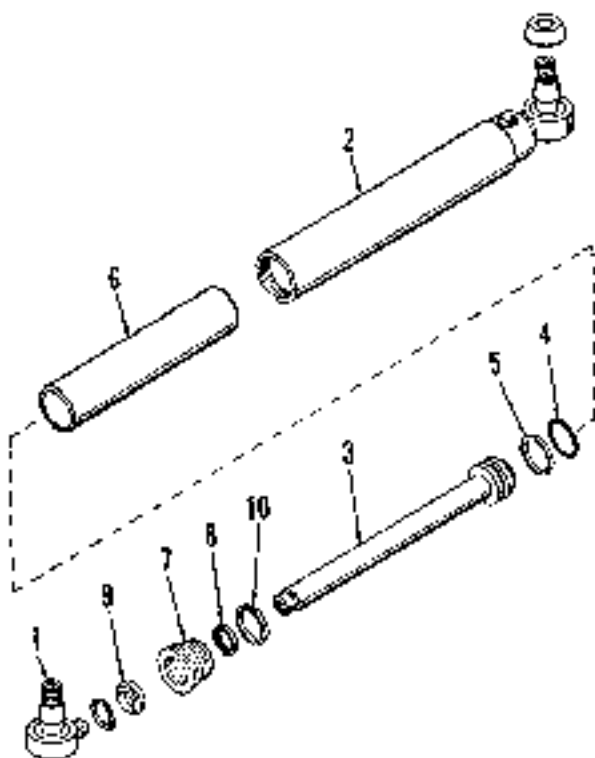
Exploded view of one type of steering cylinder used on Models MF235 and MF245 equipped with hydrostatic steering system. Refer to Fig. 23 for other type cylinder.
